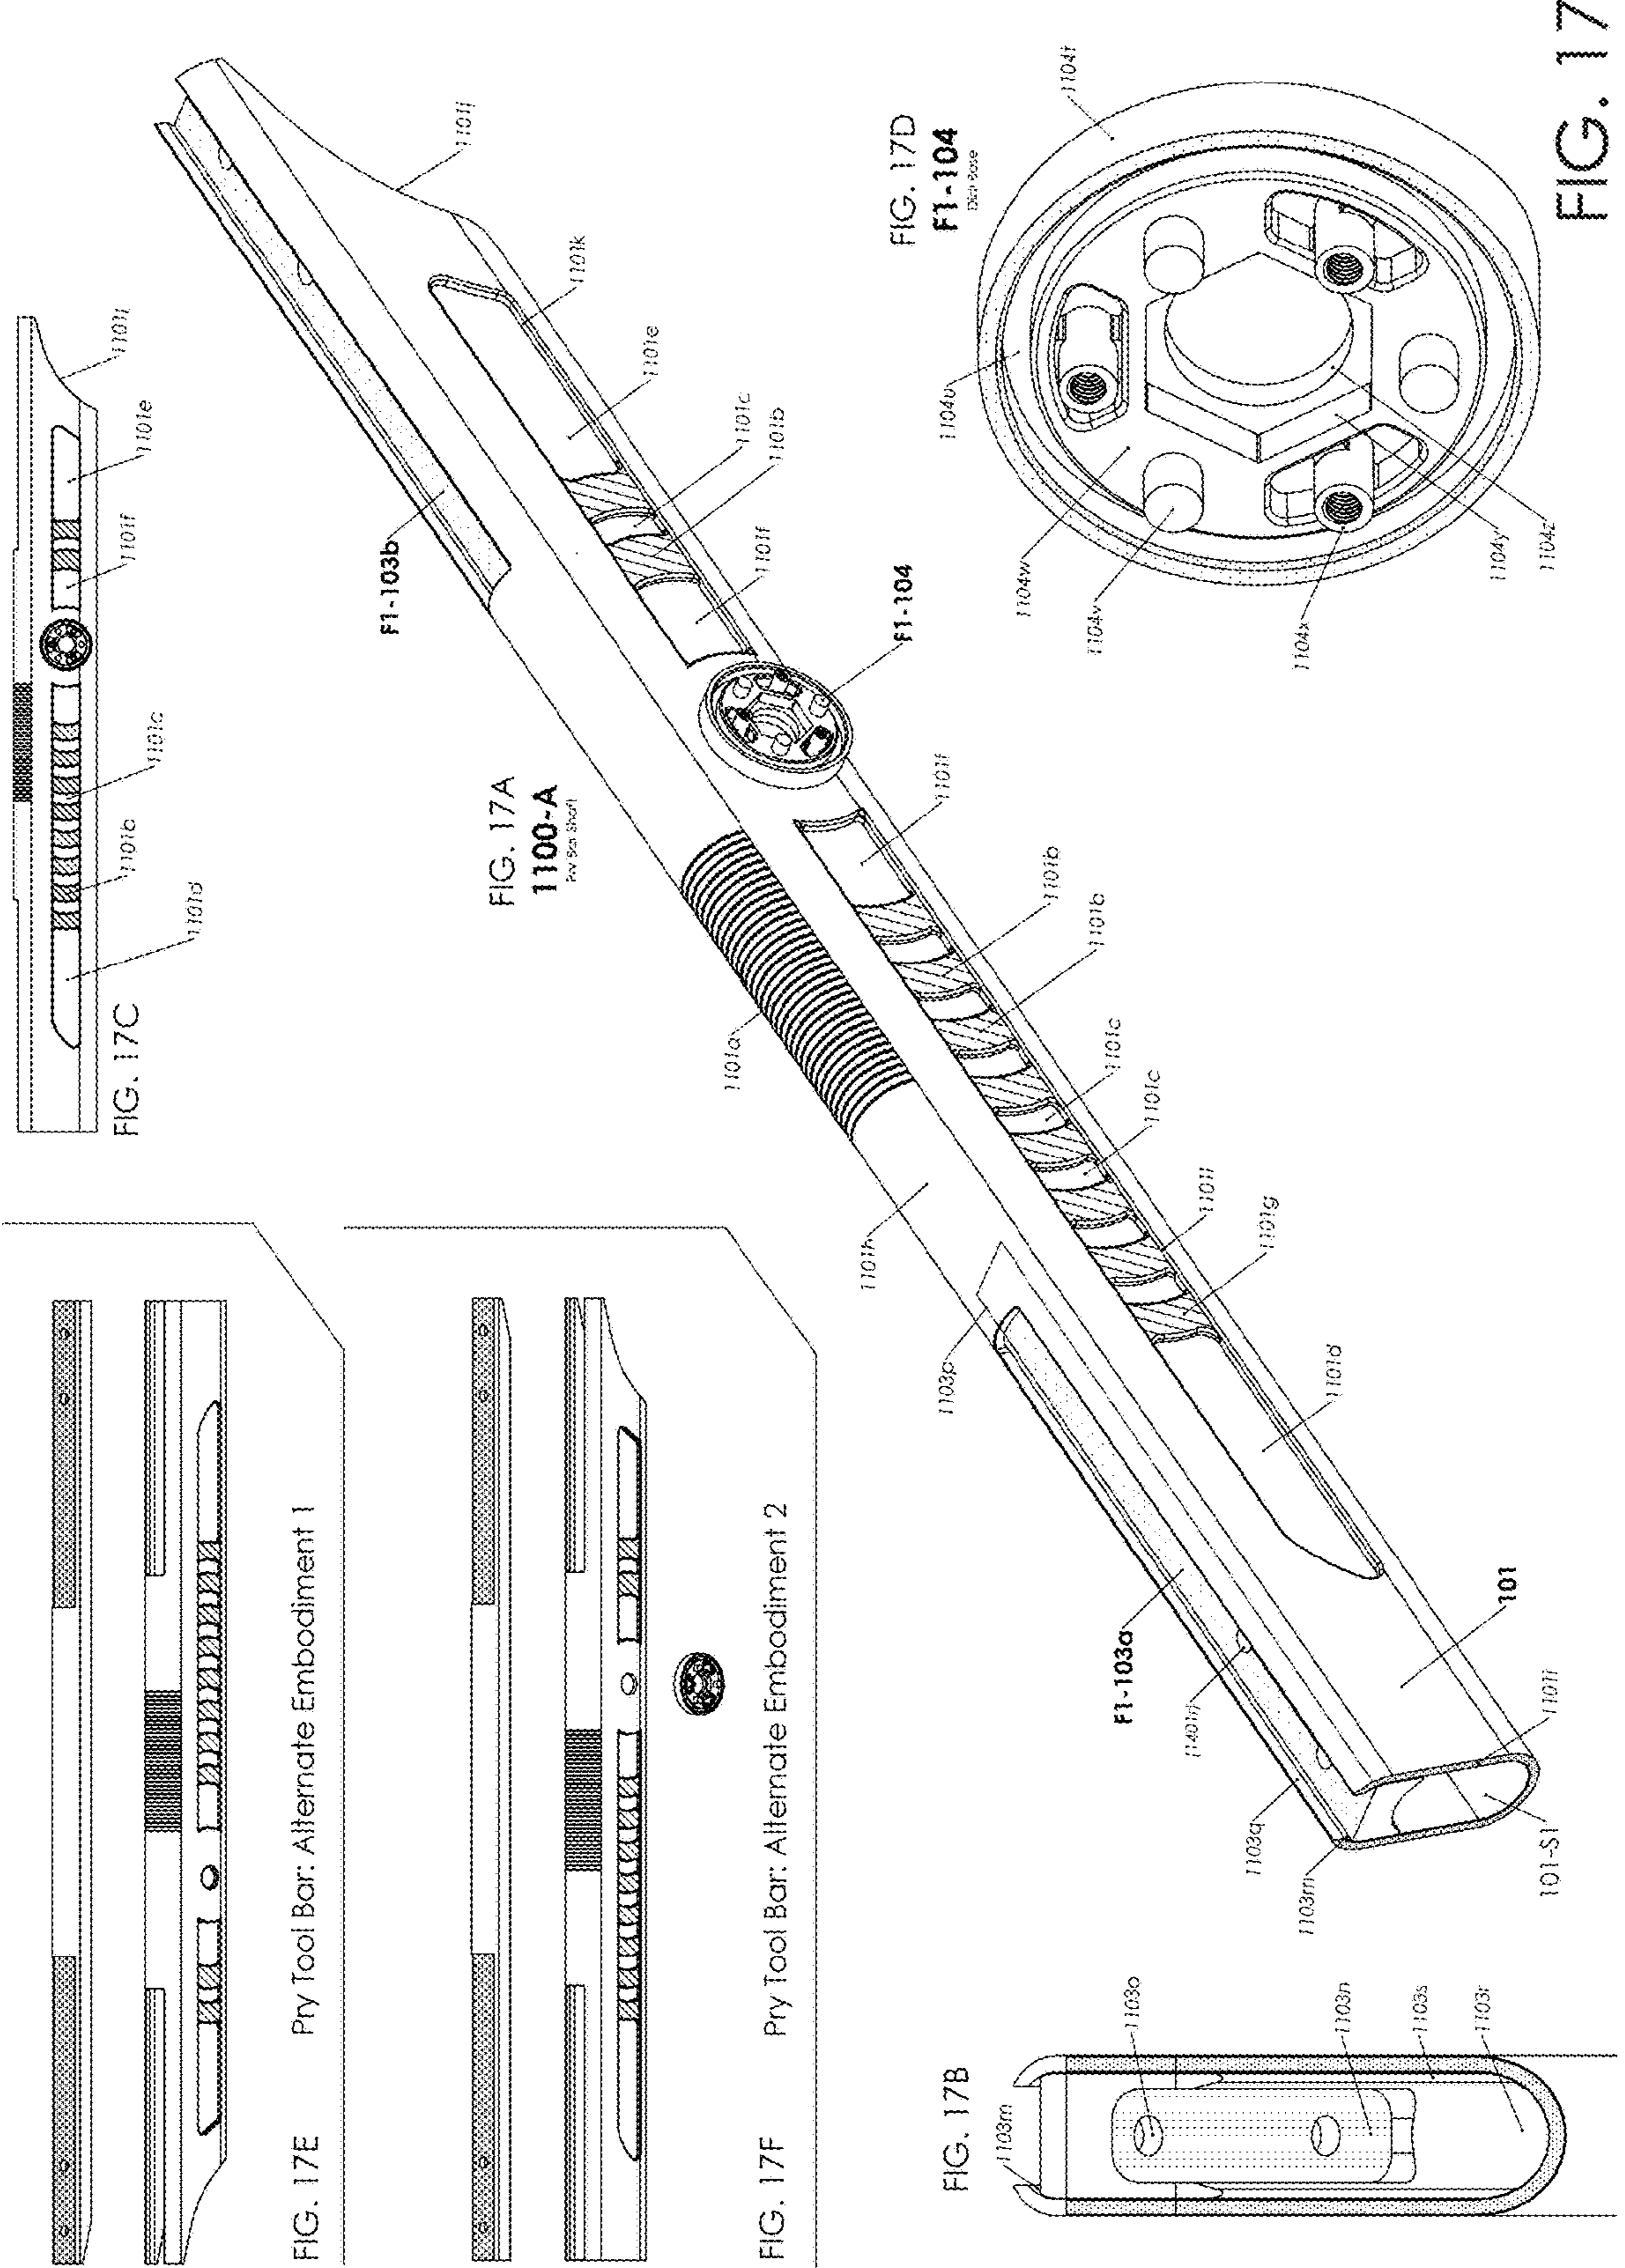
E Pry Tool Bar: Alternate Embodiment 1
